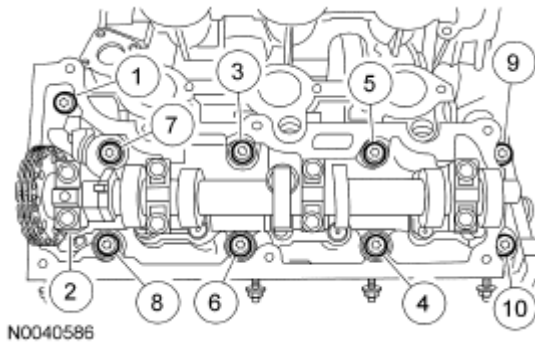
Identifying Cylinder Head Bolts Removal Sequence
